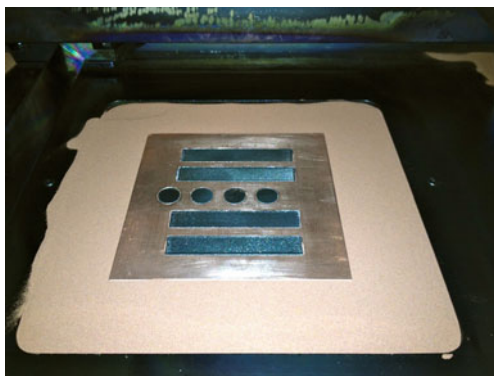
Photograph of a copper mask start plate with Ti–6Al–4V inserts as the initial setup for multi-material fabrication
